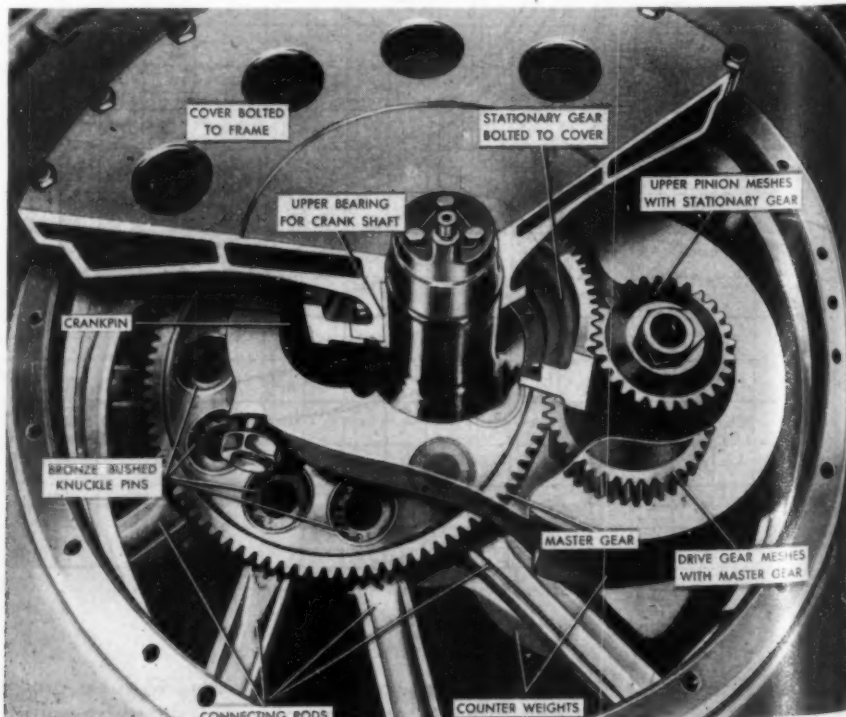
Top view of crankcase showing planetary gear train which prevents rotation of the master crankshaft bearing, thereby constraining the motion of the connecting-rod crank ends
